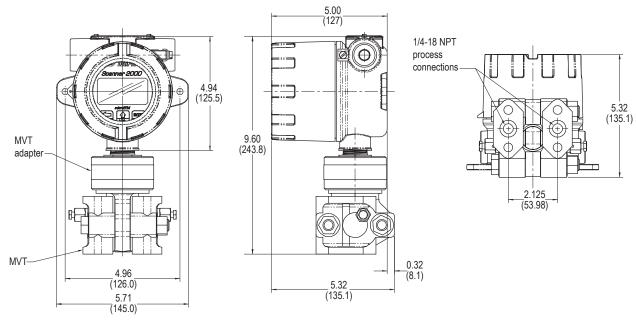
Scanner 2000 with direct-mount MVT (MVT with bottom ports shown)
